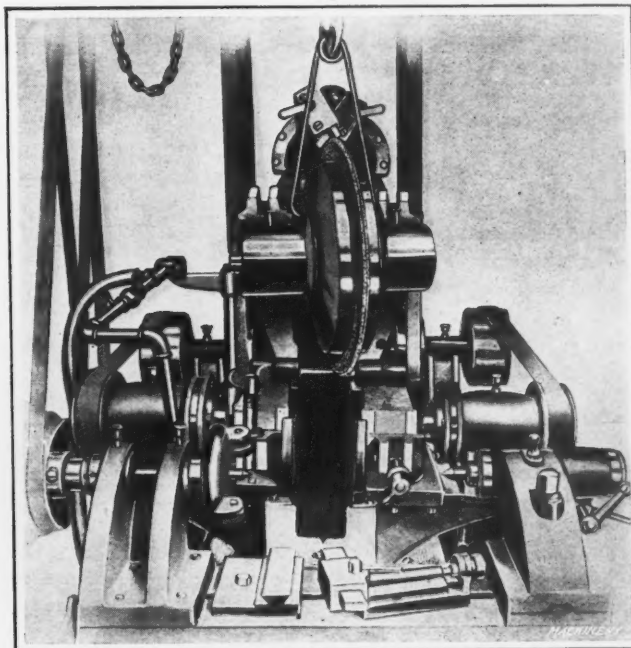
Close-up View showing Method of lifting the Wheel and Arbor out of the Bearings
